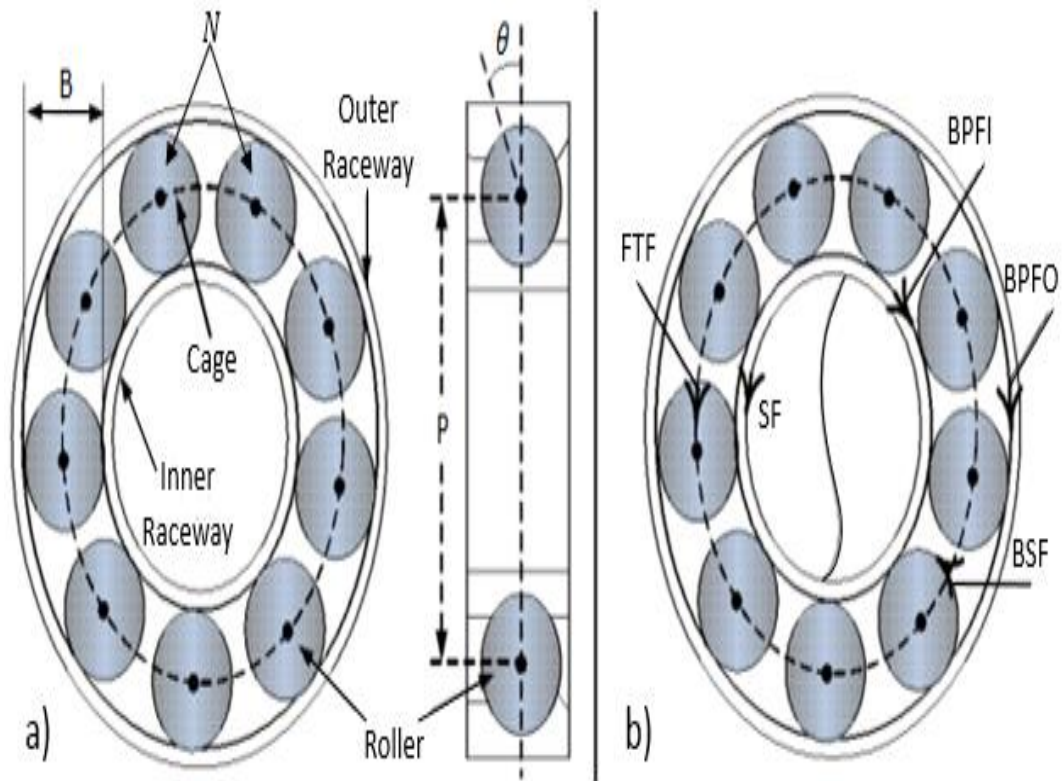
a) Roller Bearing Geometry and the Angle of Rolling Element relative to raceway b) Roller Bearings Basic Frequencies- adapted from (Tahir et al. 2017).
